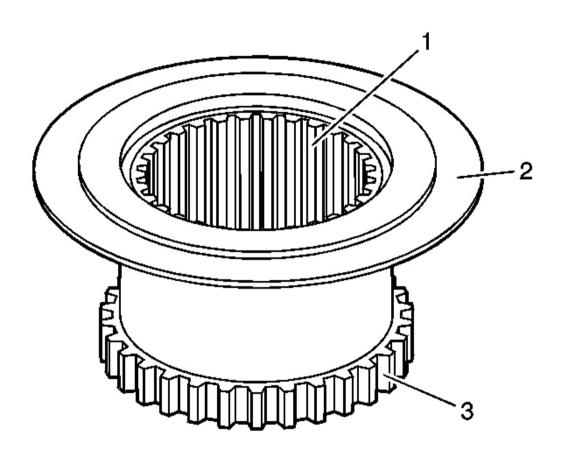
Inspecting High/Low Range Shift Sleeve Courtesy of GENERAL MOTORS CORP.
